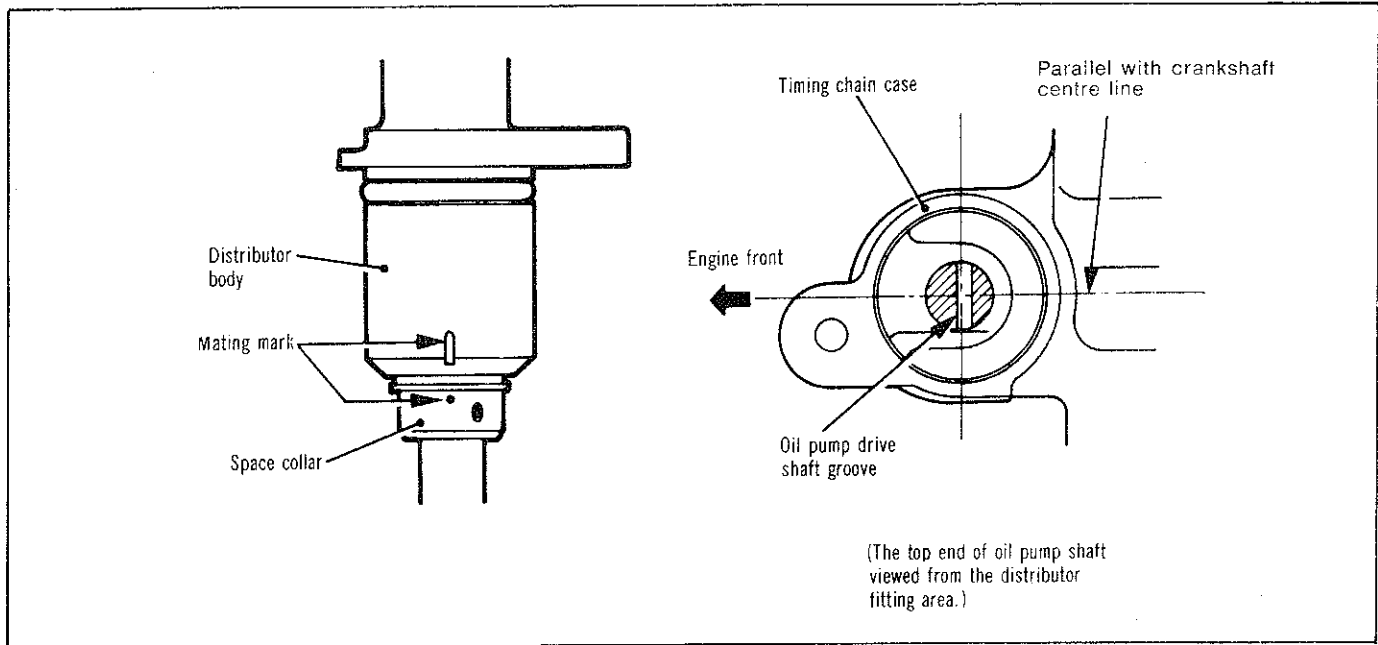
Distributor alignment marks (chain drive camshaft engine)
